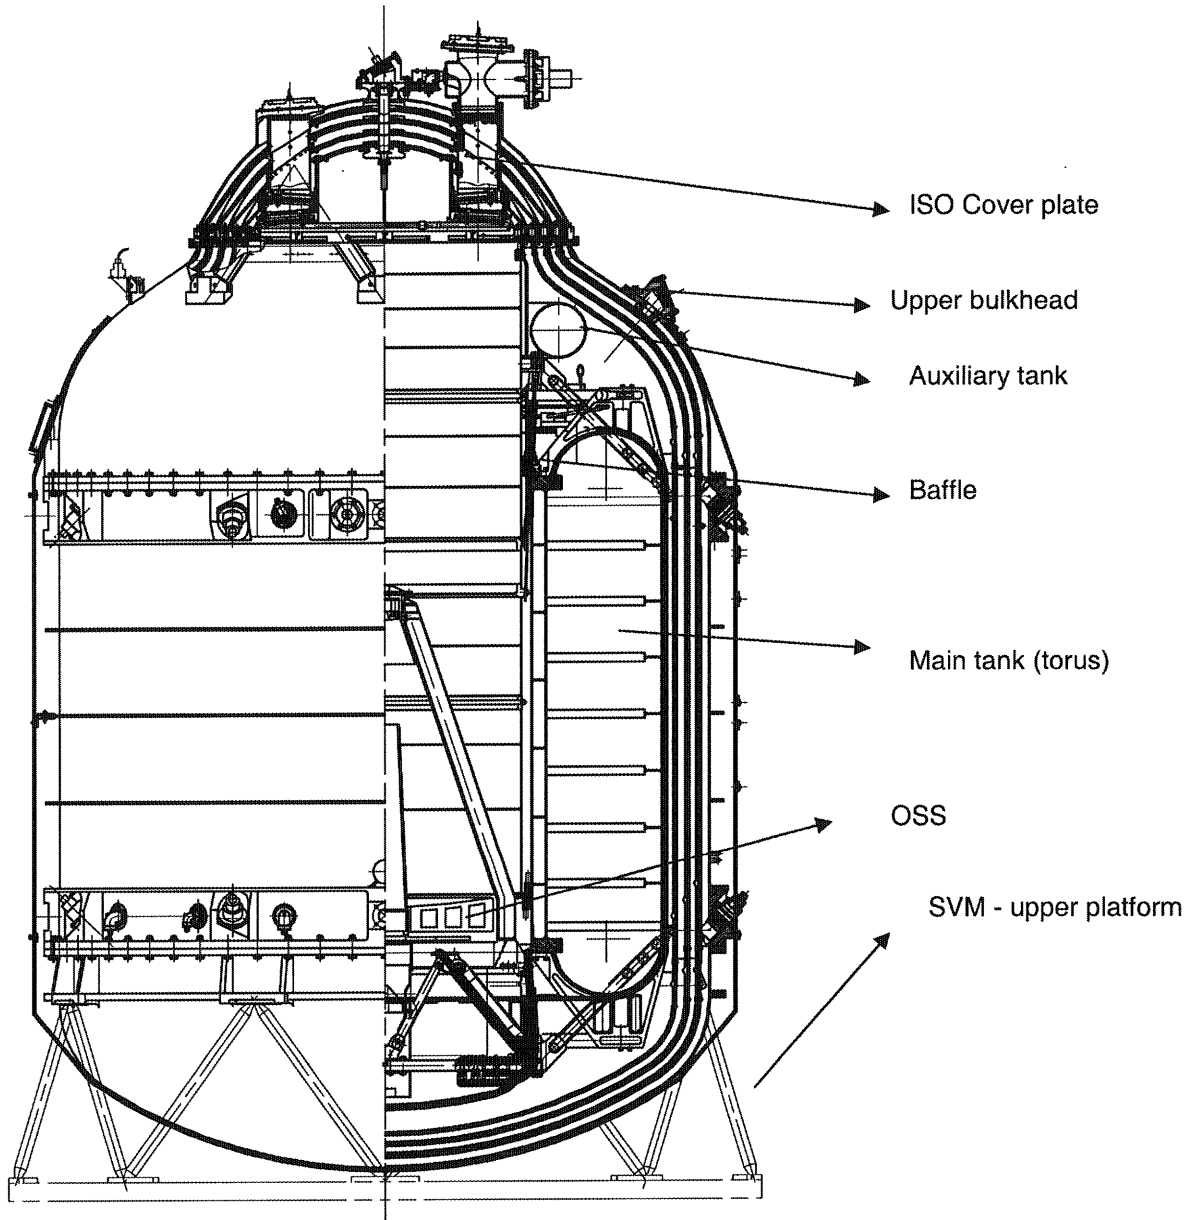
ISO PLM/QM – Parts to be disassembled
